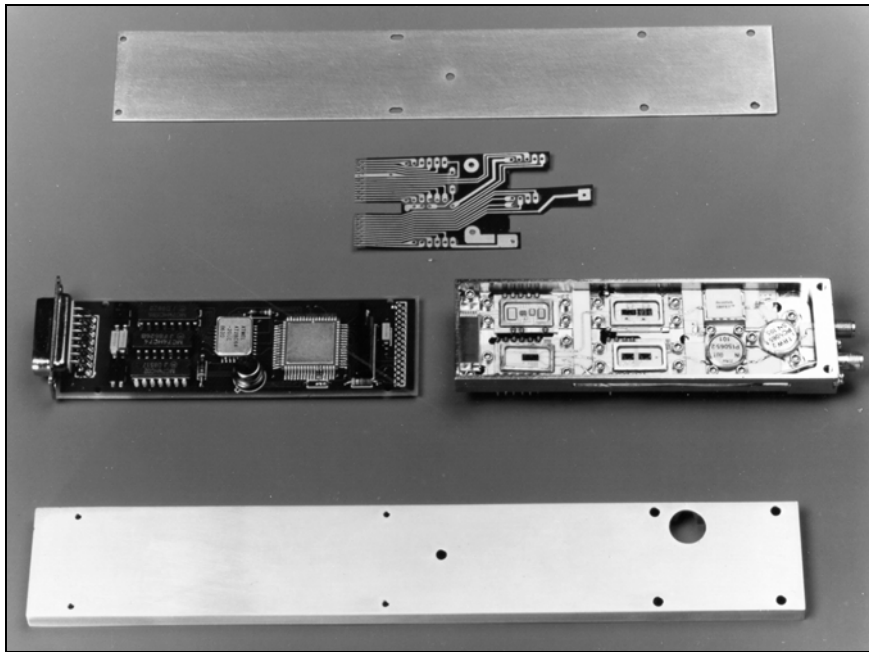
C BAND T/R MODULE (EXPLODED VIEW)
